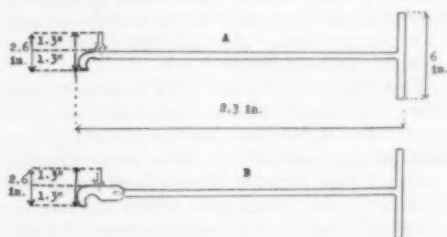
A sketch showing the dimensions of the embryotome. The instrument should be made of stainless steel. The knife and handle can be one piece (A) or two pieces (B) with a removable handle. The ring can be fastened with screws, or soldered.
